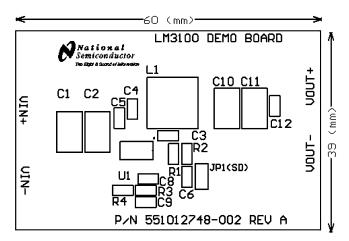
LM3100 Demonstration Board PCB Top Overlay
